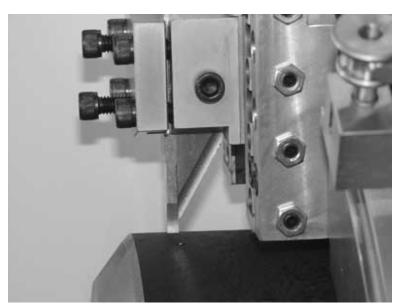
Insert the tooling as shown with the offset between the parting blades at 1/16 inch from each other.
